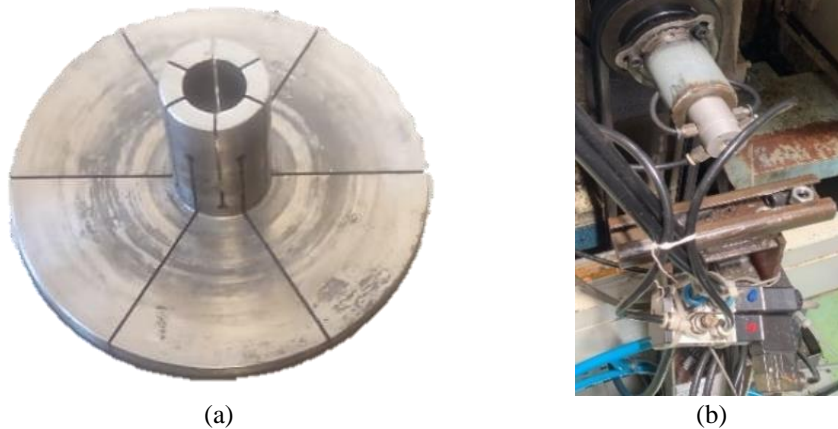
Component: (a) Collet Clamp; and (b) Pneumatic Valve and Rotary Joint Set
